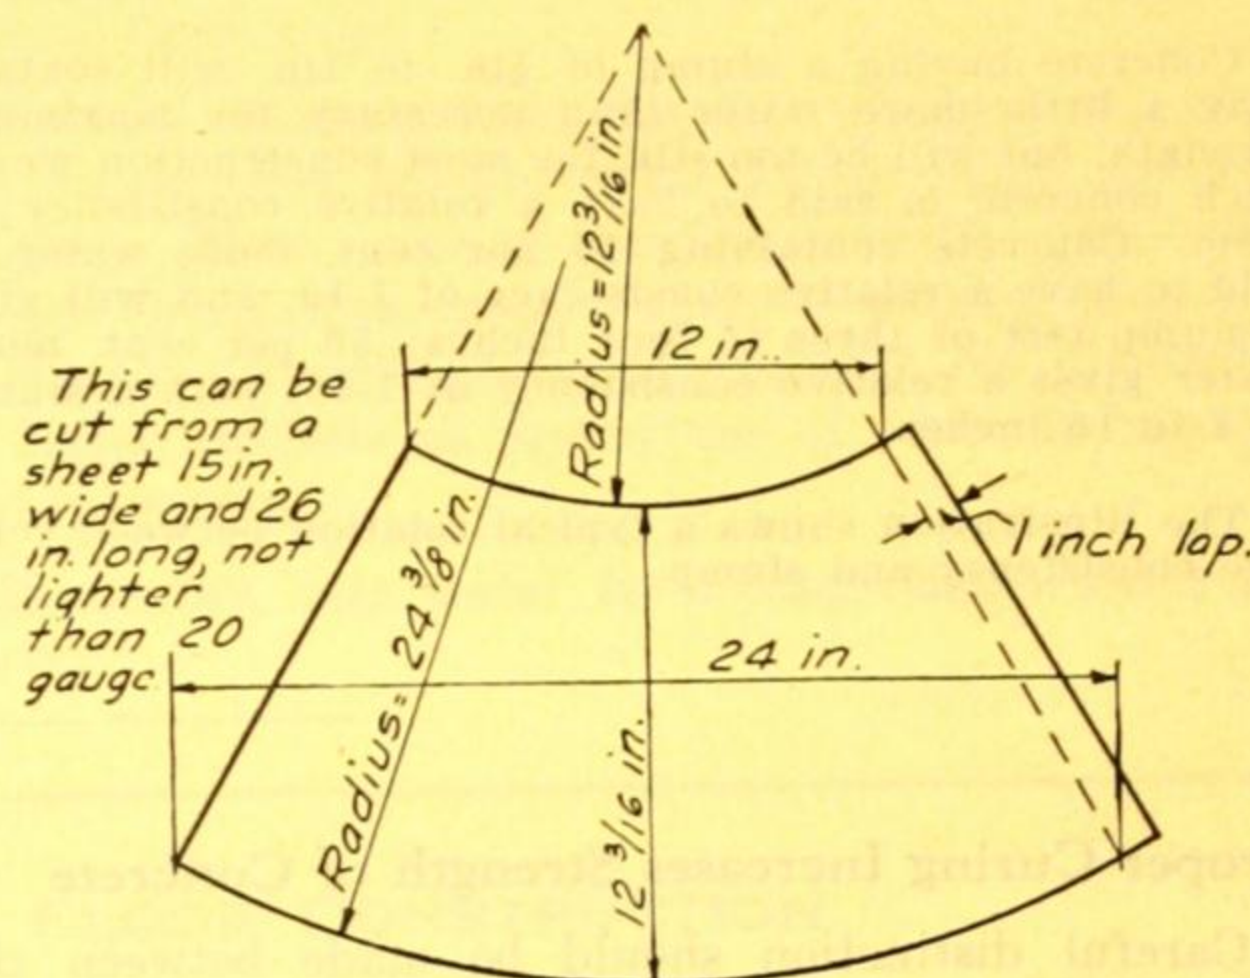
Diagram for cutting metal to make the frustum of a cone used for the slump test.
